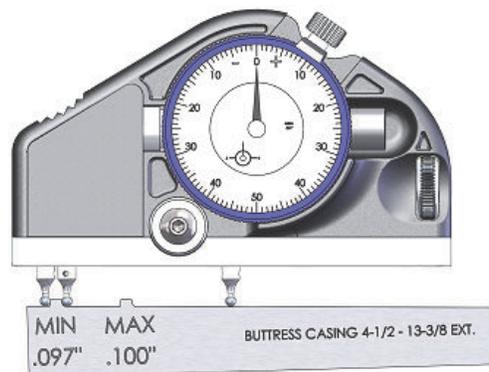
Buttress Tooth Width Gauge (Measured from Thread Root)
